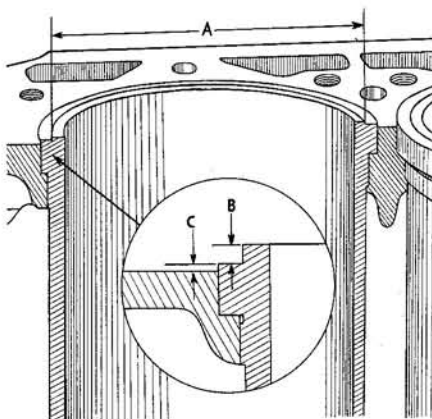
Cross-sectional drawing of spigoted cylinder sleeve installed in cylinder block. Spigot diameter is "A" and height is "B". Sleeves should protrude 0.002-0.004 (dimension "C") above cylinder block.
